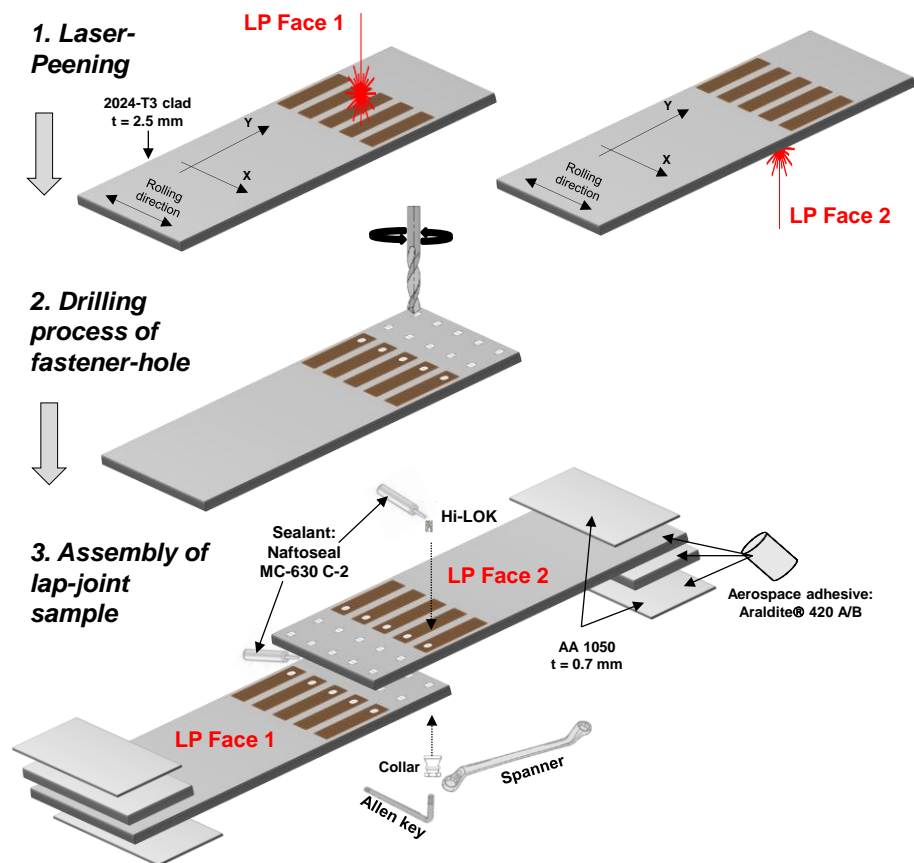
Manufacturing process of LJ fatigue test samples. 1. Laser-Peening 2. Drilling of fastener hole 3. Assembly of LJ sample which includes the application of aerospace sealant and extra tabs at sample end (gripping area) are bonded to the LJ sample to reduce secondary bending and to protect the area from gripping devices.
